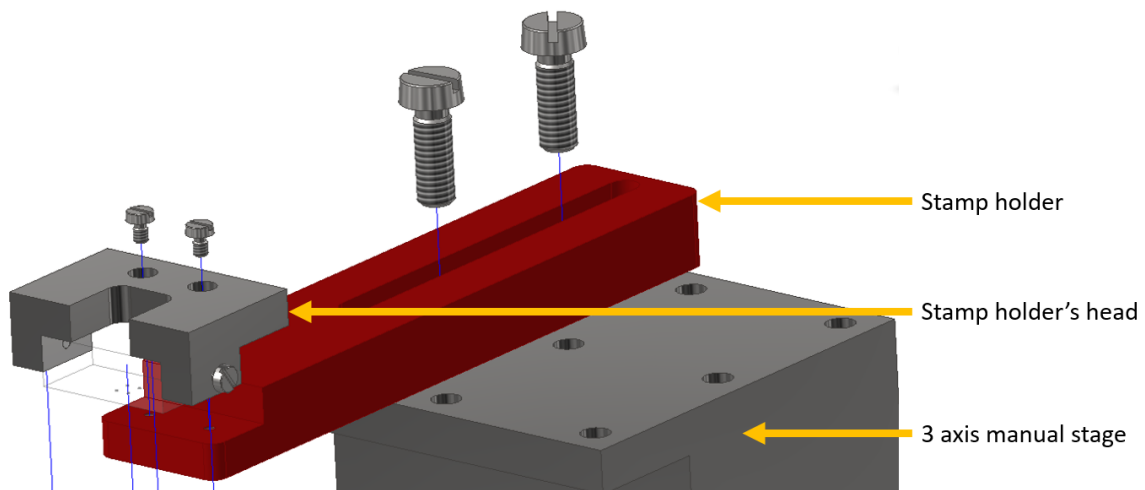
The stamp holder's head is screwed on the stamp holder which is mounted on the 3 axis manual stage.
